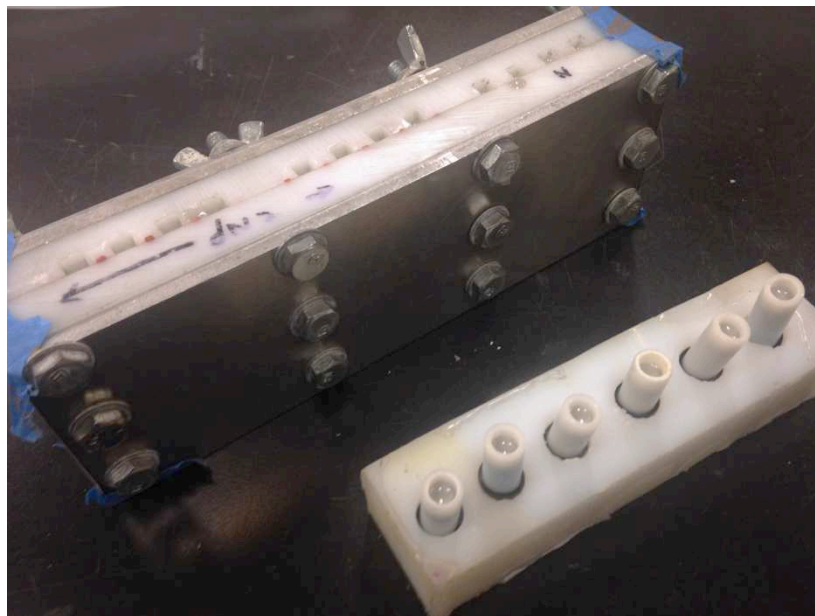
Molds used to produce unreinforced MEYEB samples. Picture shows molds filled with the uncured MEYEB resin.
